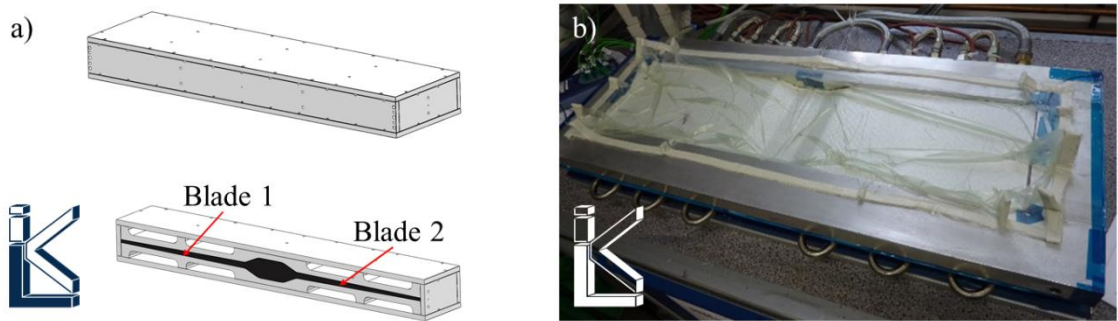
Curing mould geometry (a); preforming mould during compaction (b)
